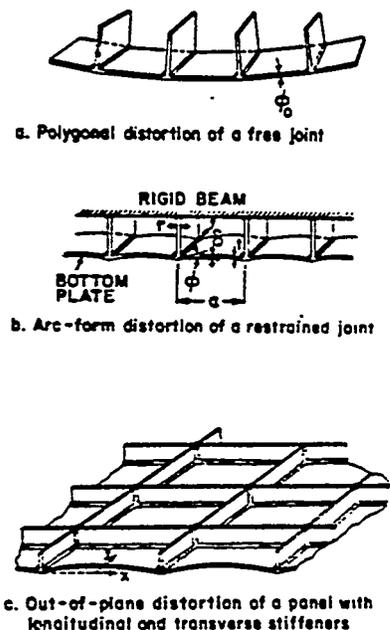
Distortions produced by angular changes at fillet welds (6)
